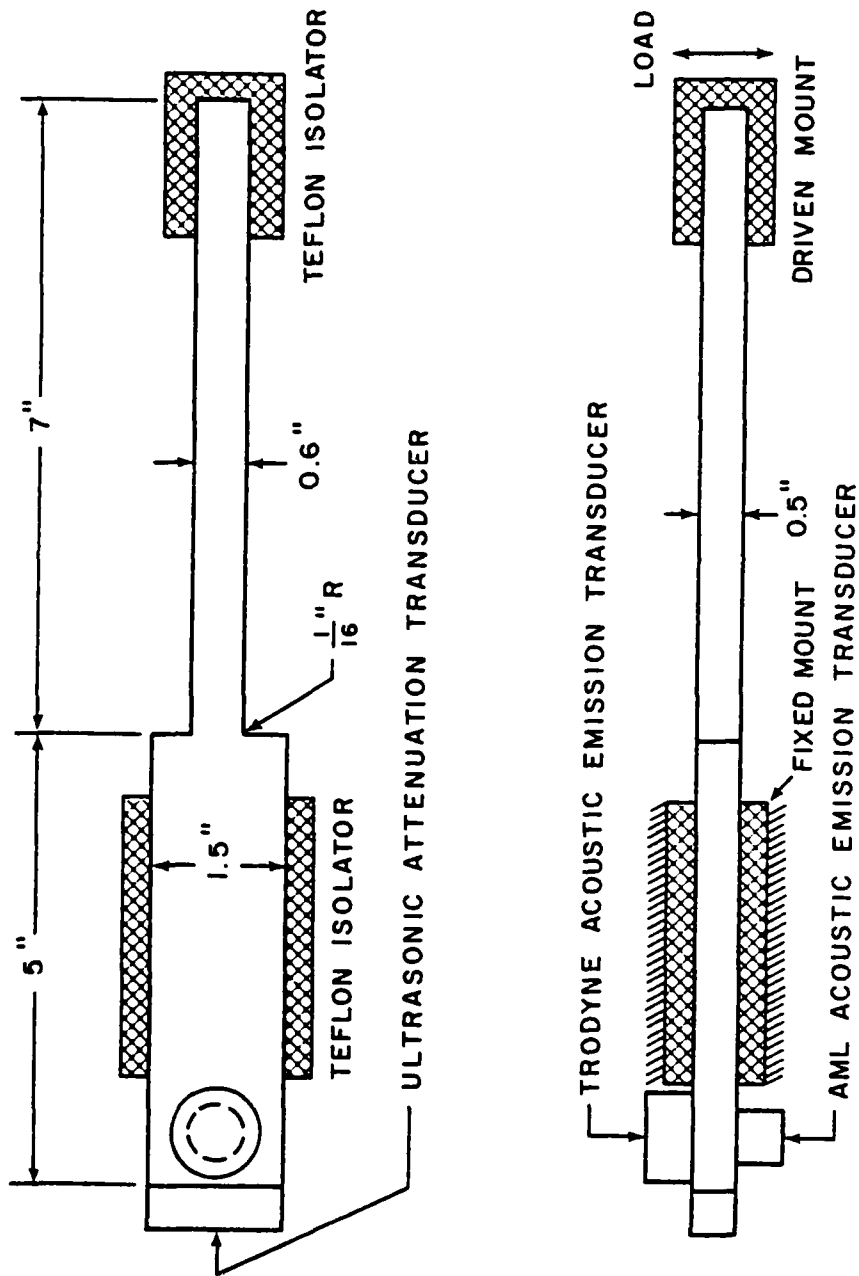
TOP AND SIDE VIEW OF FATIGUE TEST SPECIMEN
